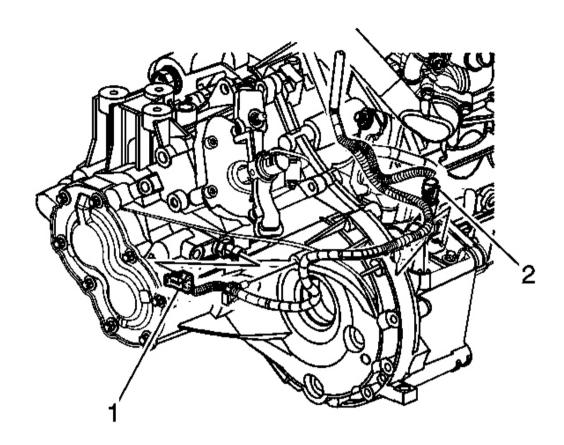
Front Wheel Speed Sensor VSS Electrical Connector Courtesy of GENERAL MOTORS CORP.
